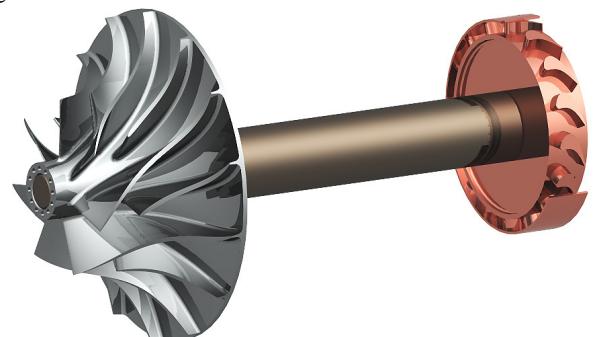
CAD drawing of the high-pressure spool with the centrifugal impeller and the turbine.
